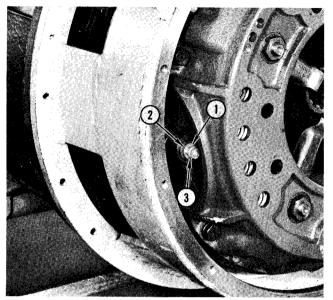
CHECKING RELEASE ADJUSTMENT 1. Bushing 3. Locknut
